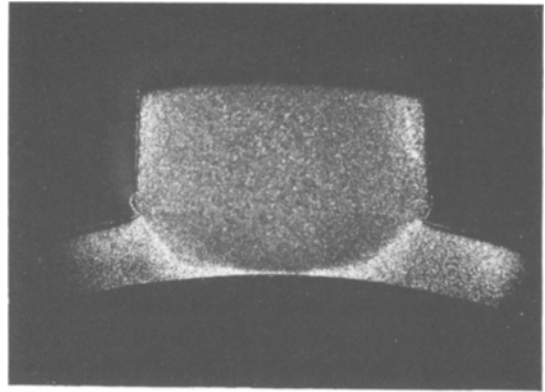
Resistance welded joint between a bearing pad and a sheath. Polarized illumination ($\times 18$).
